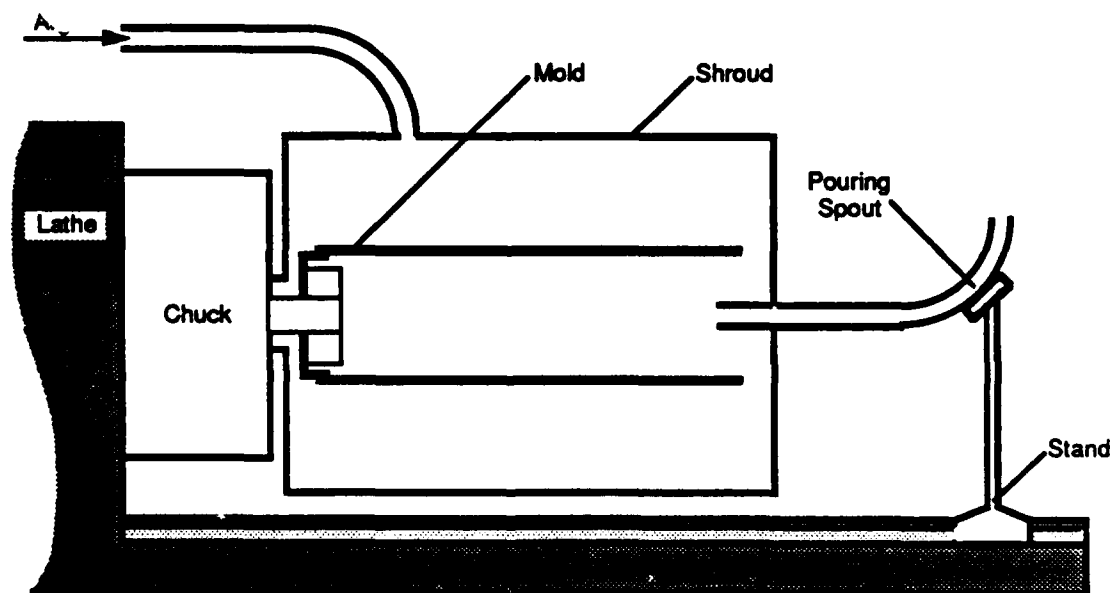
Schematic of the Laboratory Scale Centrifugal Casting Fabrication Apparatus
